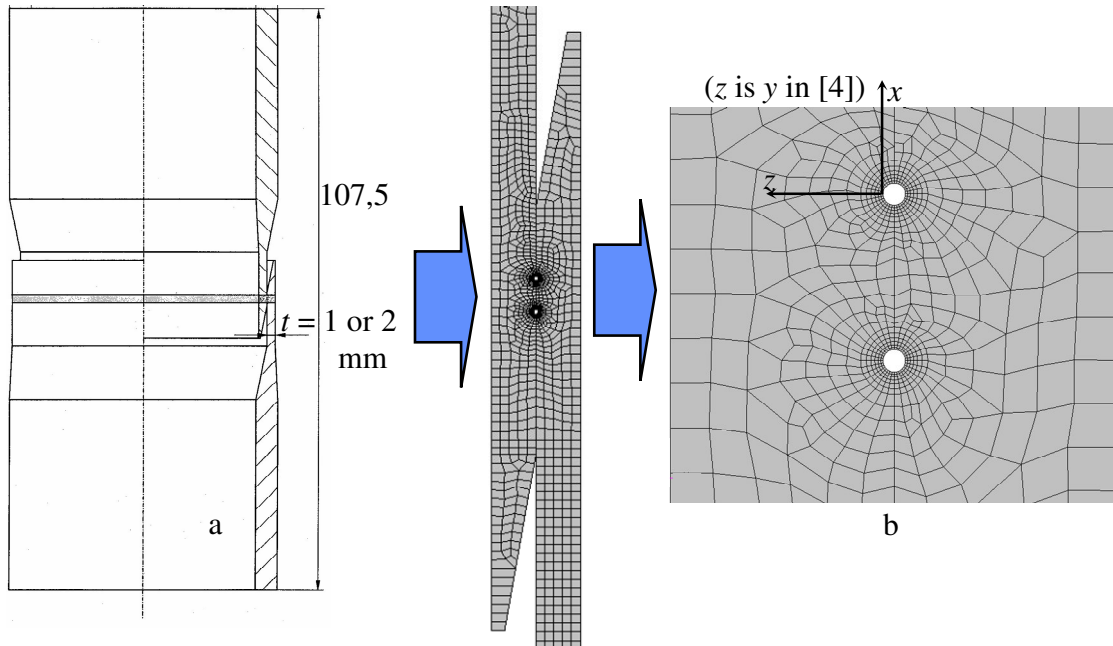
The welded tube-tube specimen (a) and the FE keyhole notch model (b)
